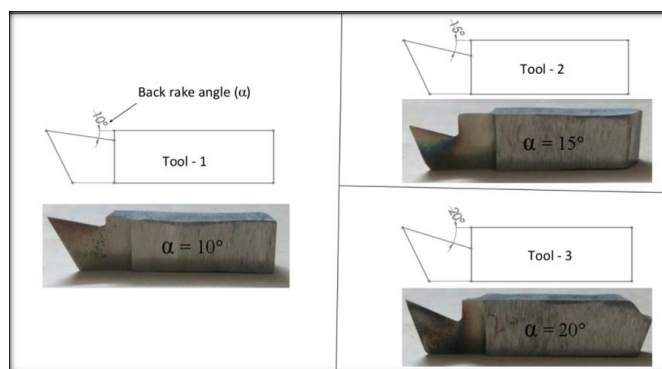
2D - Drawings of Tools with Varying Back Rake-Angles
